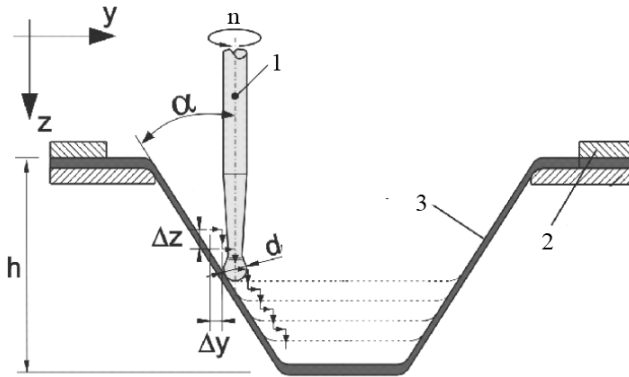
Basic principle of the incremental sheet forming process, [30]: 1 – Forming tool; 2 – Clamping device; 3 – Raw material
